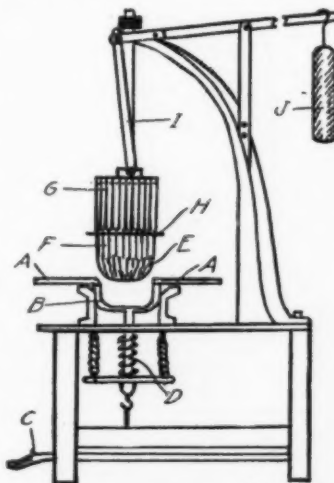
PLEATING AND FORMING MACHINE, CLOSED.
